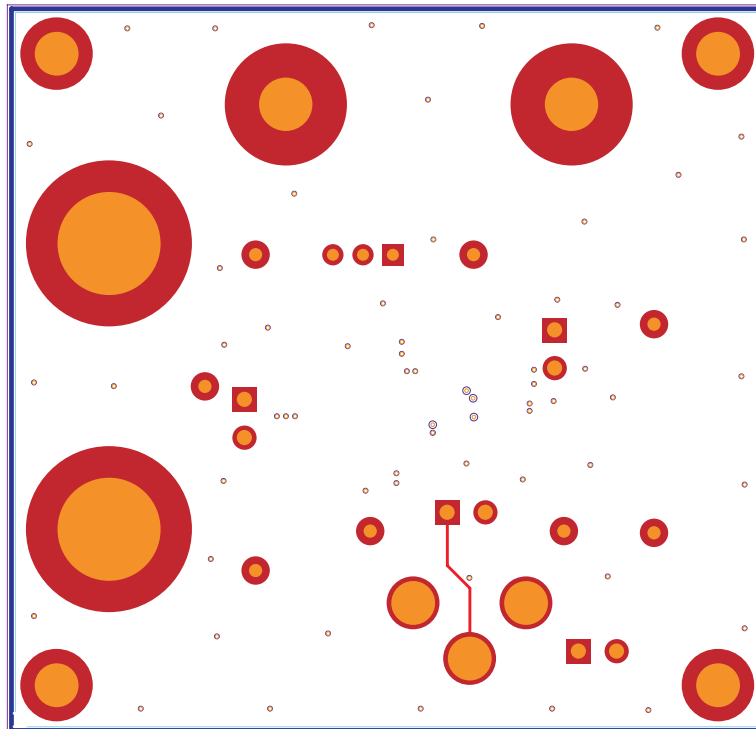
TPA2100P1 – YZH Package – Bottom Layer Revision B
